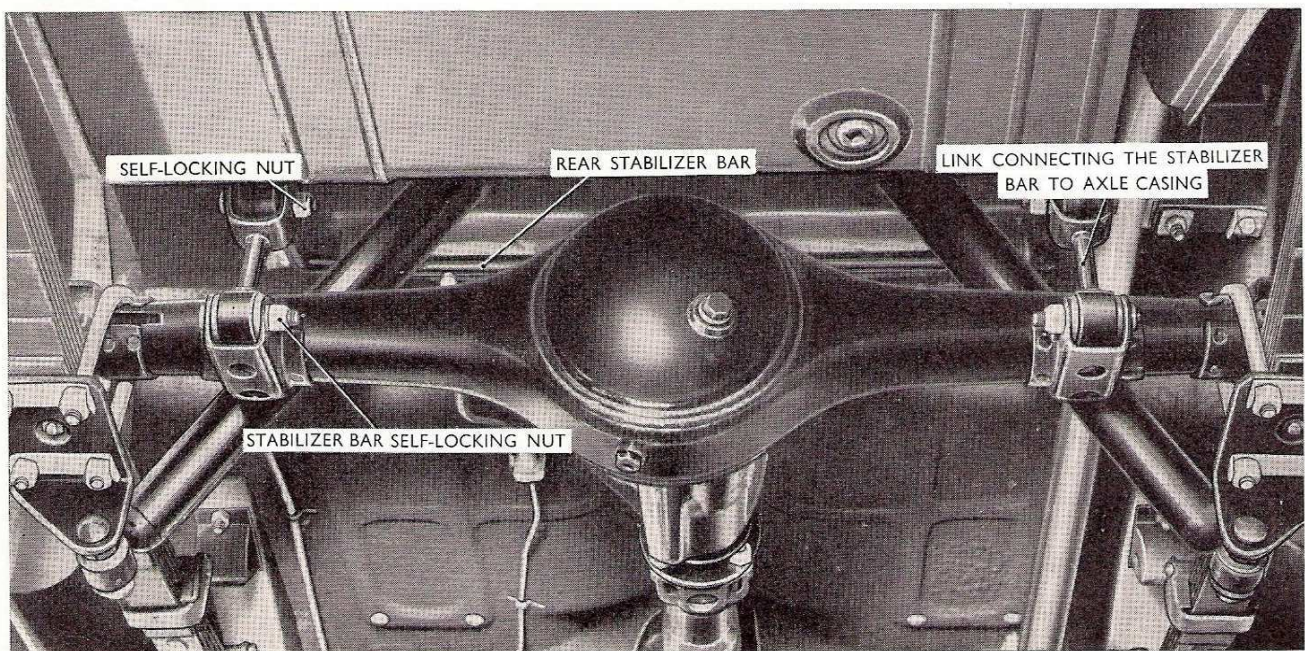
Bottom view of car rear end and detail of stabilizer bar mounting.
